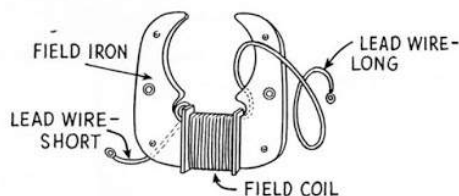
Unit field coil and iron assembly. Both coil and iron must be replaced when coil is burnt out.
